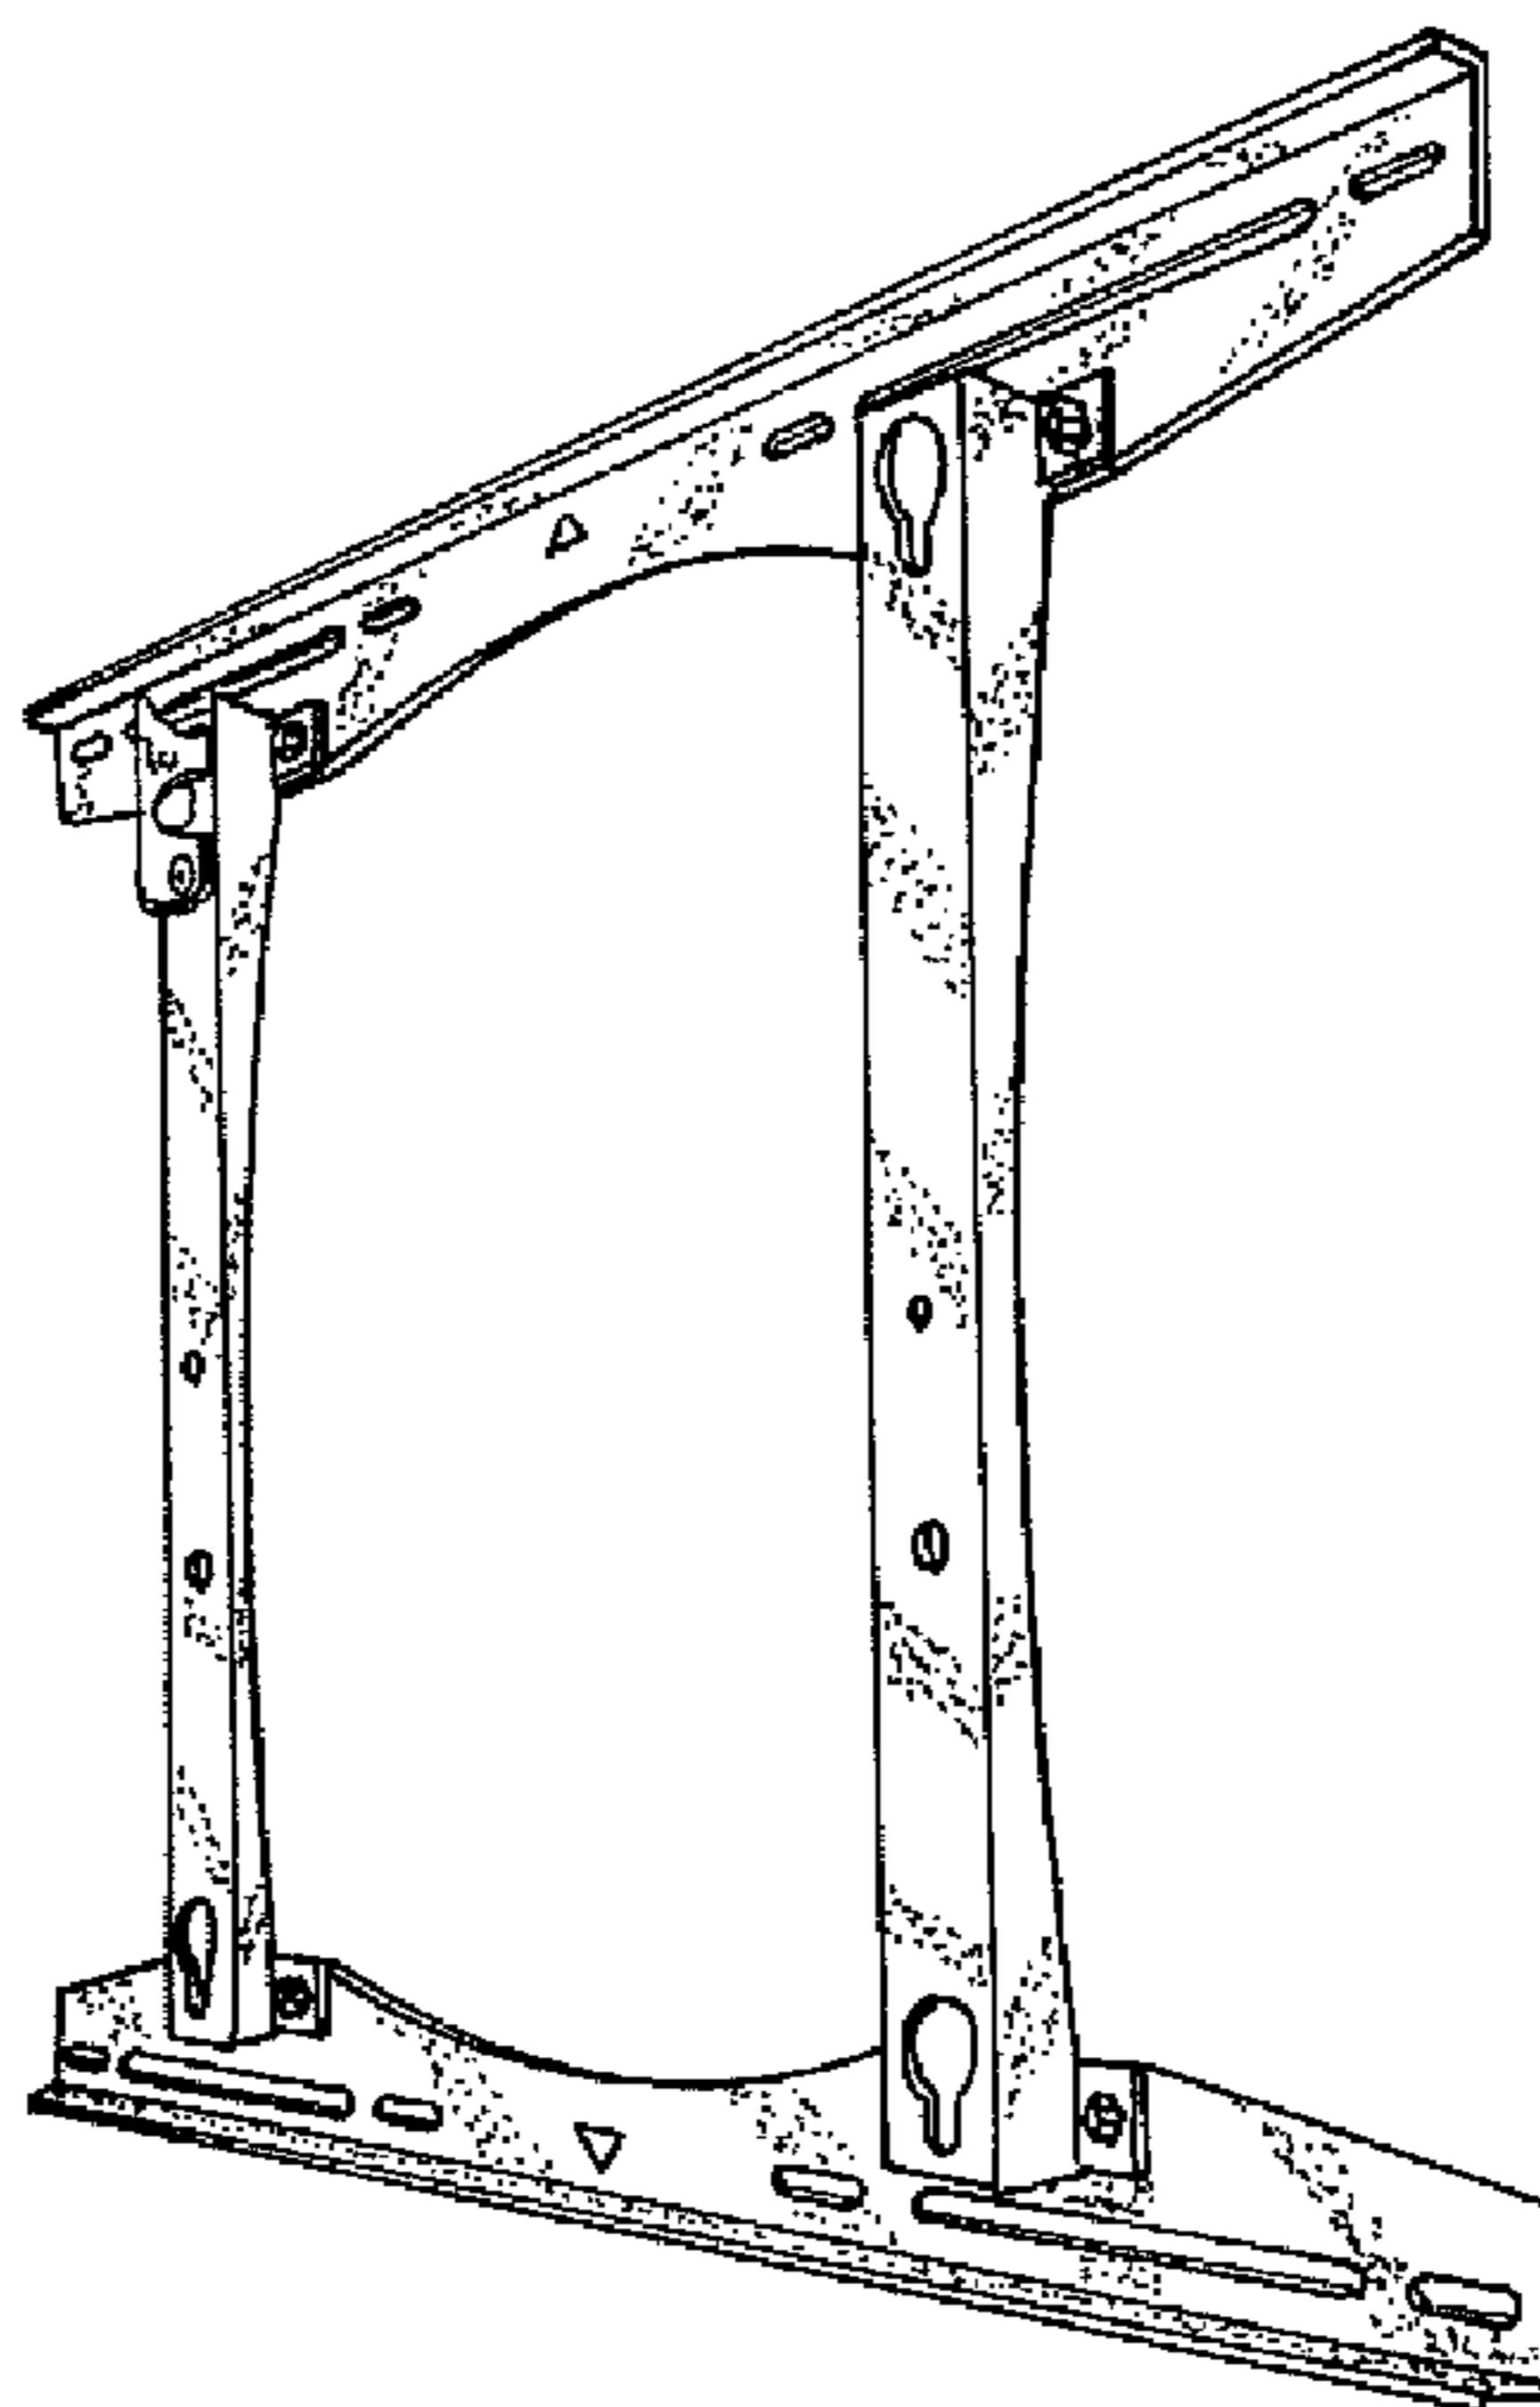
is a rear elevation view of the mounting bracket for flat panel display of FIG. 1;
